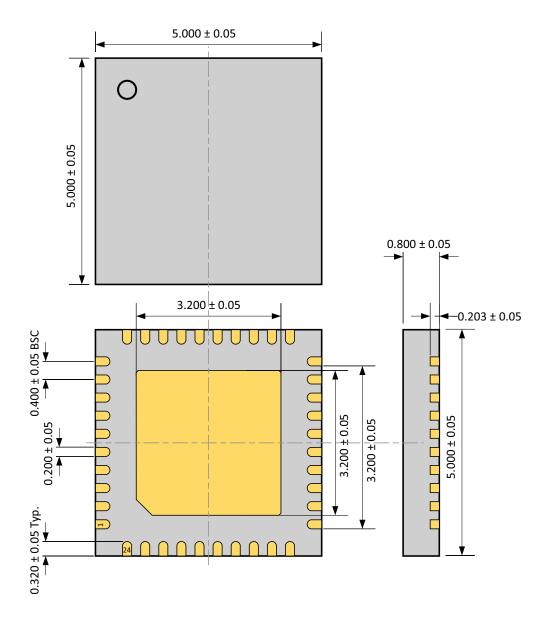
QFN 40-pin 5x5mm Drawing (All Dimensions in mm)
